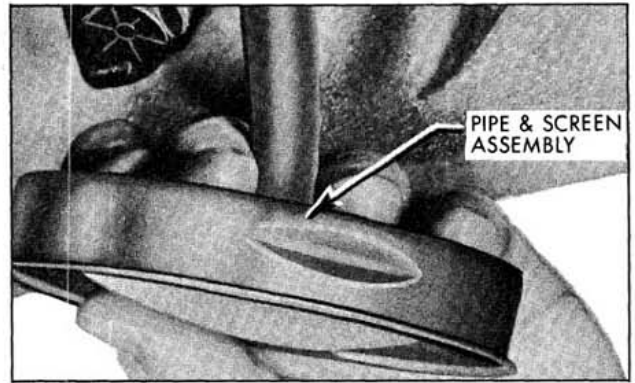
A Oil Pump Pipe and Screen Assembly
